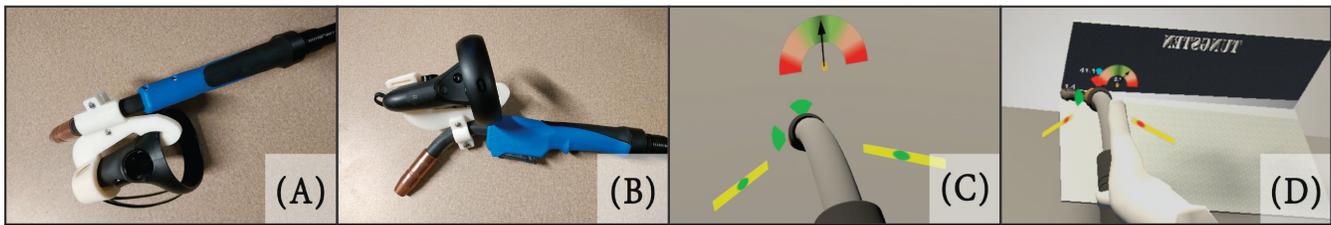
Design of the welding gun for feedback (from left to right) (A) top view of the welding gun attached with the 3D-mount, (B) side view of the welding gun, (C) Graphical design for real-time feedback in VR (Left and top arrows, the two lines, and the indicator arc provide feedback for the travel and work angles, distance, and the travel speed, respectively), (D) Screenshot showing real-time feedback while virtual welding.
